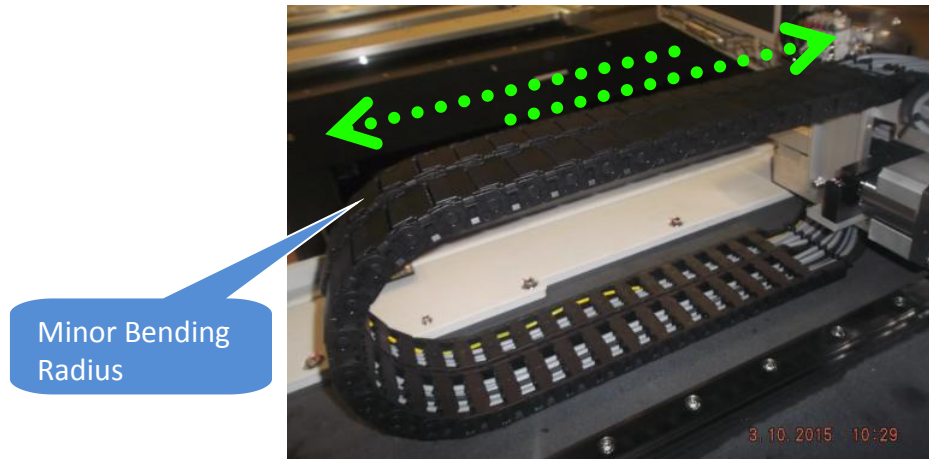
Stepper Motor Cable Routing (Y Axis Wide E-Chain)
